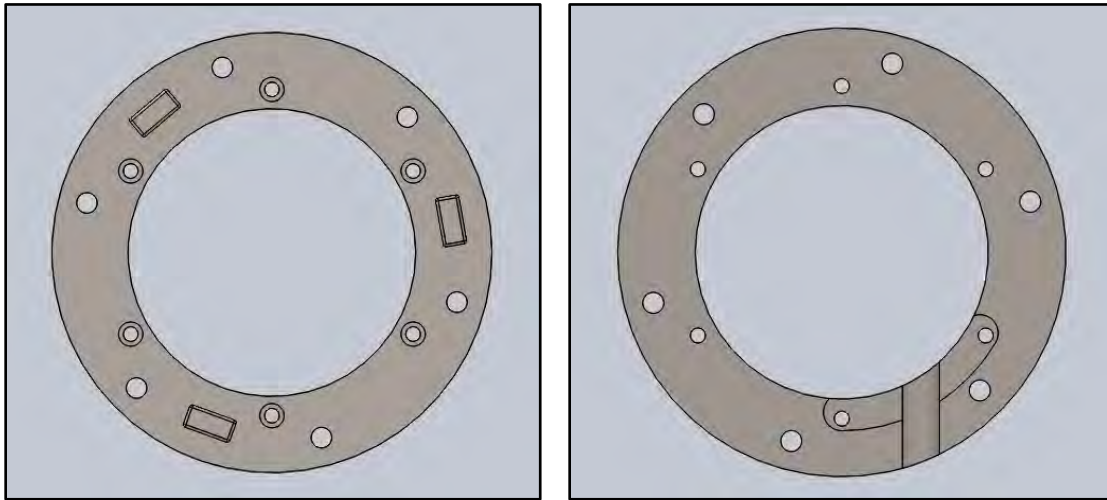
The mounting flange viewed from the side attaching to the throat (left) and the side flush to the engine's back plate (right).
